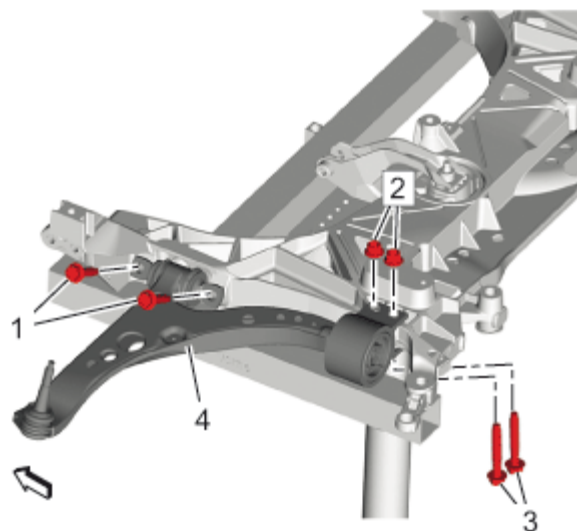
Front Lower Control Arm, Bushing Bolts And Nuts
